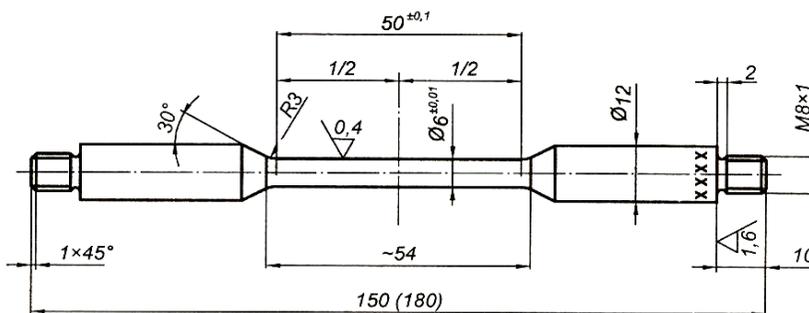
Shape and dimensions of samples used for hot torsion tests.
